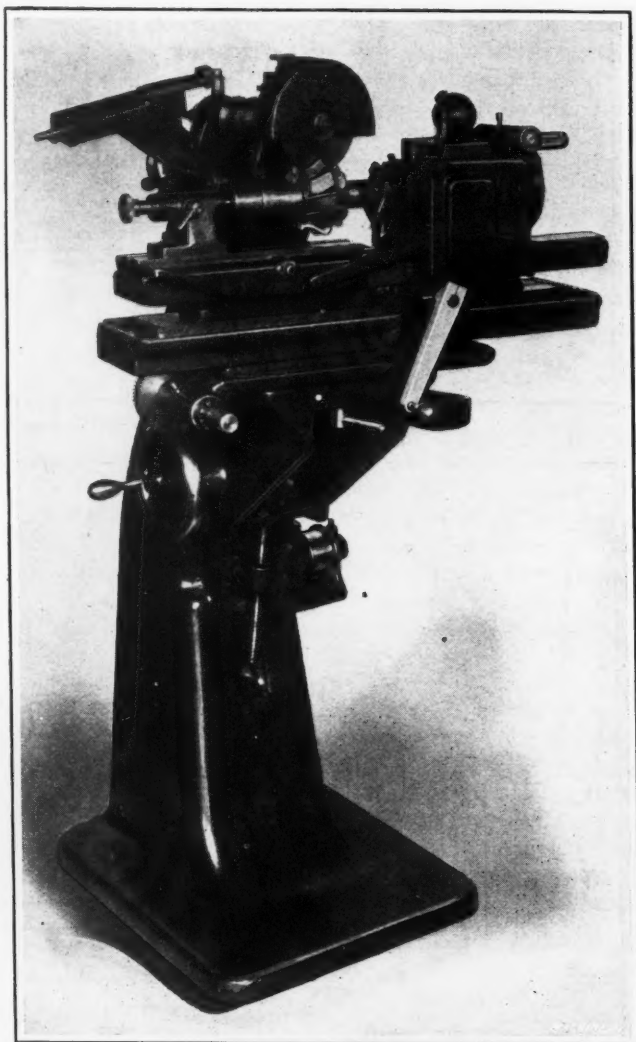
Front View of Cutter Grinding Machine, showing Hand-operated Lever and the Grinding Wheel in Operation on a Cutter
